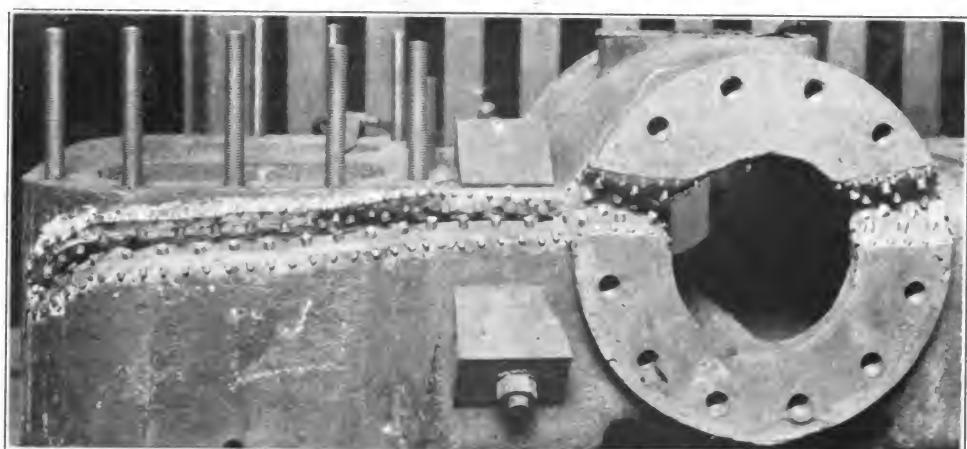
Broken cast iron pump, showing method of preparing the surfaces for bare arc welding
